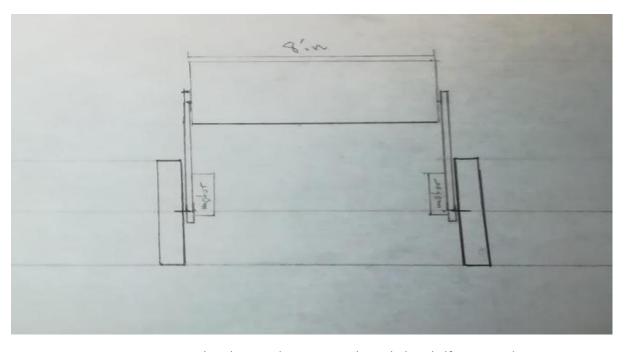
Sketch 4: Preliminary Technical Sketch (front view)
